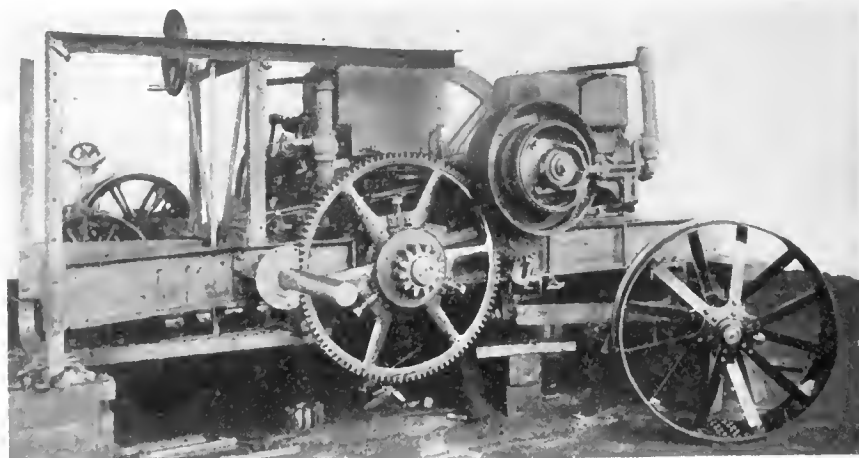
TRACTOR IN COURSE OF ERECTION, SHOWING SUBSTANTIAL CONSTRUCTION OF REAR AXLE DRIVING MECHANISM.
